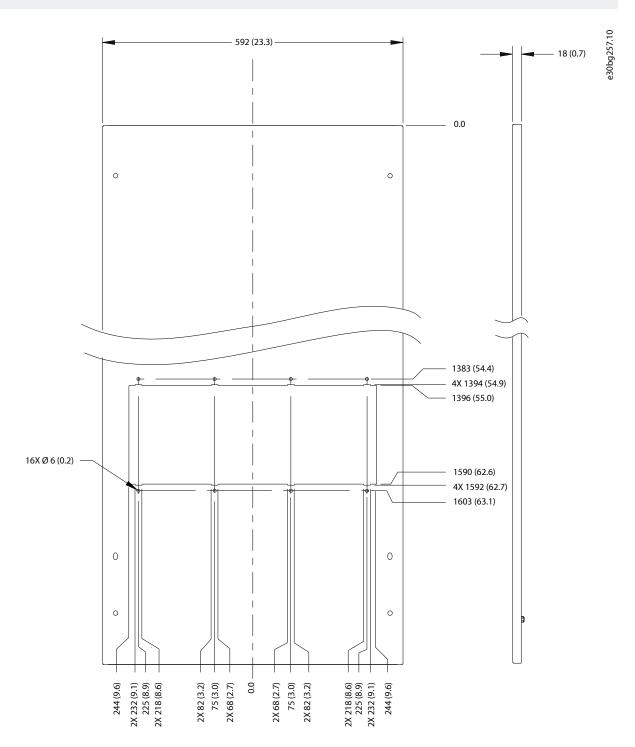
Vent Dimensions for Backplate in 600 mm (24 in) Cabinet
